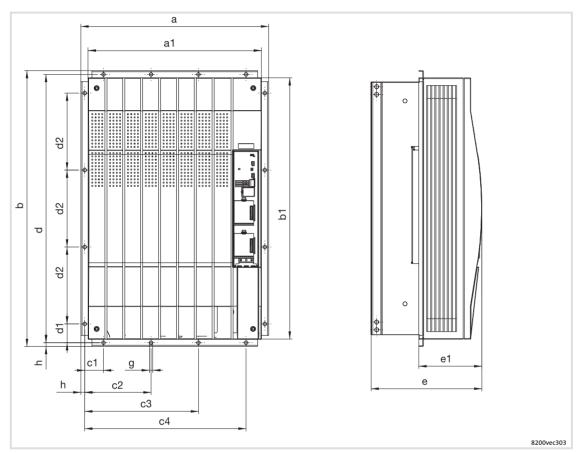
Dimensions for thermally separated mounting 75 ... 90 kW
